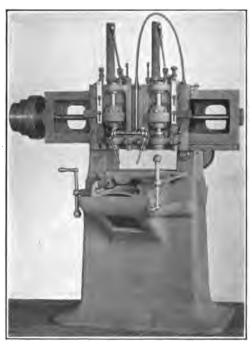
Profiling machine. (Courtesy Pratt & Whitney Co.)
